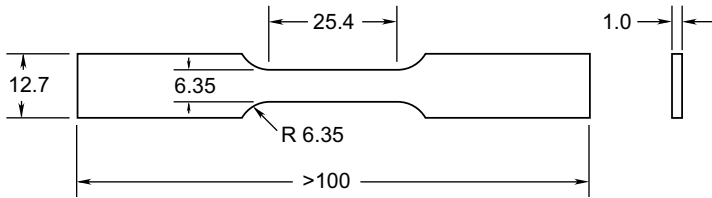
Uniaxial specimen with dimensions shown in mm.
